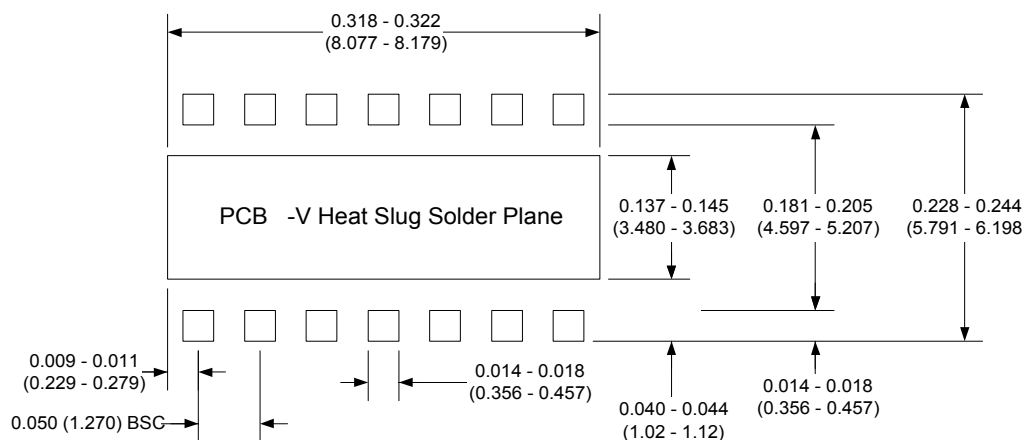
PCB Heat Slug solder plane dimensions (14L SOIC NB)
